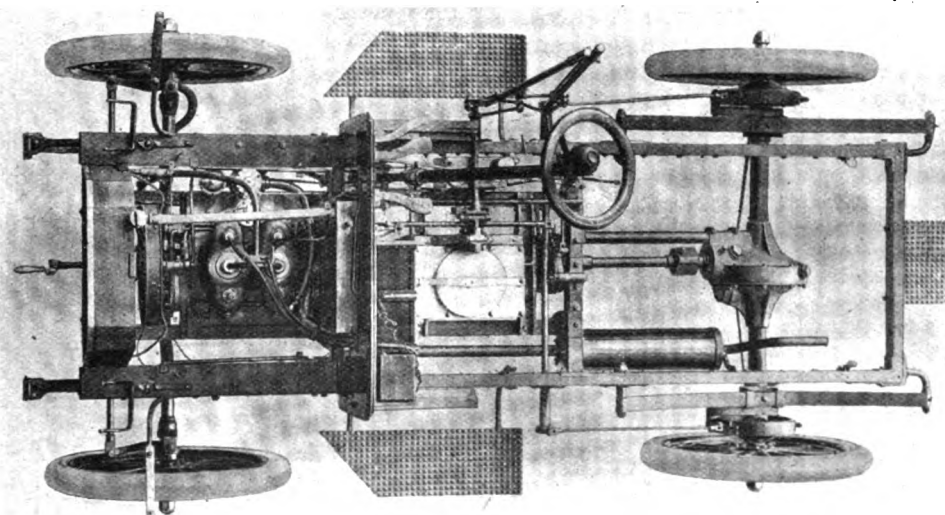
Chassis of Spyker Two-Cylinder Car.
